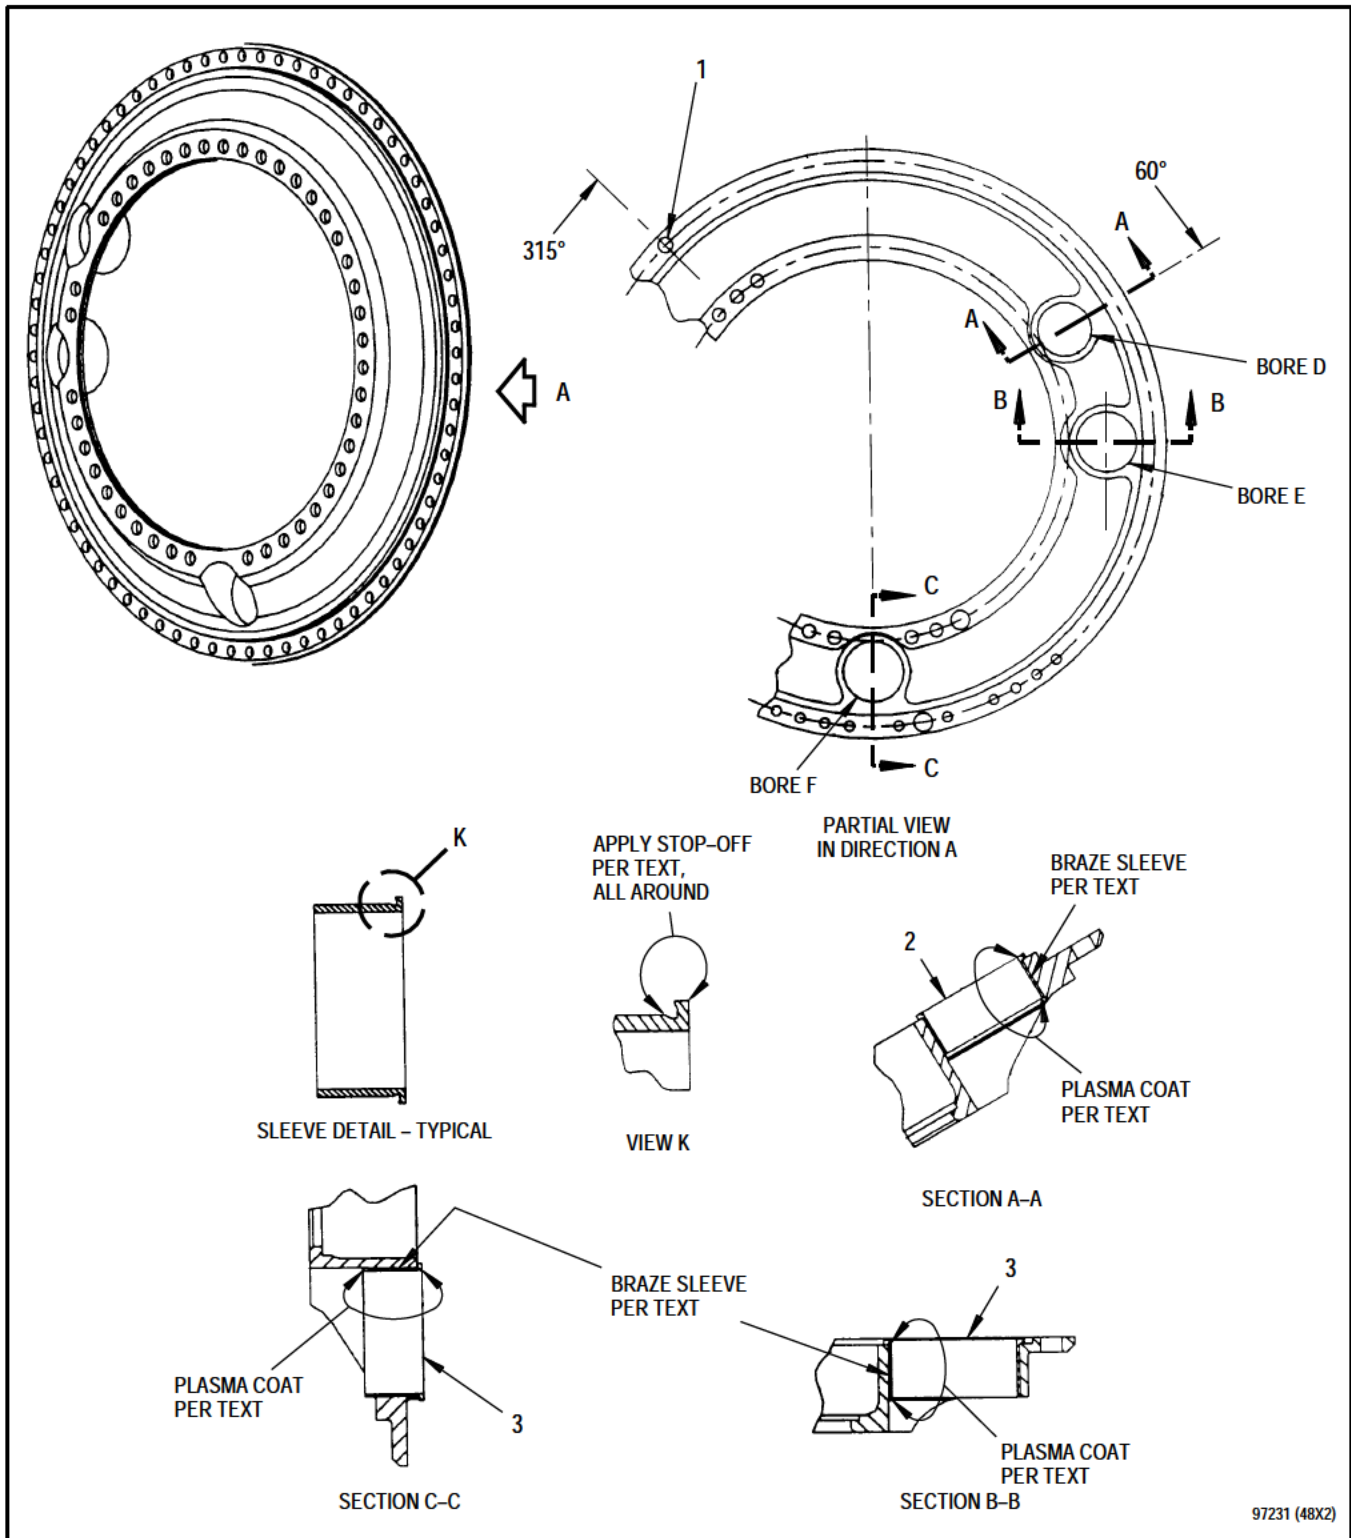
No. 4 Bearing Front Air Sealing Flange Metal Seal Ring Contact Surface - Sleeve Repair (Sleeve Installation and Plasma Spray)
